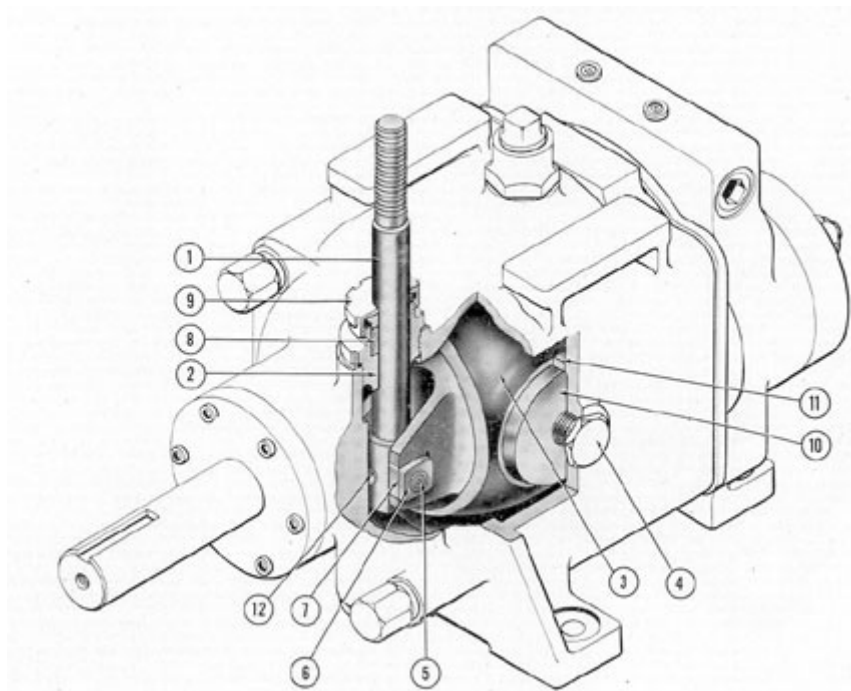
Cutaway of control shaft. 1) Control shaft; 2) control shaft bearing; 3) tilt-box; 4) tilt-box retaining trunnion; 5) control trunnion pin; 6) control guide block (outer); 7) control guide block (inner); 8) packing; 9) packing-gland cup; 10) trunnion; 11) trunnion bearing; 12) dowel pin for control trunnion pin.
